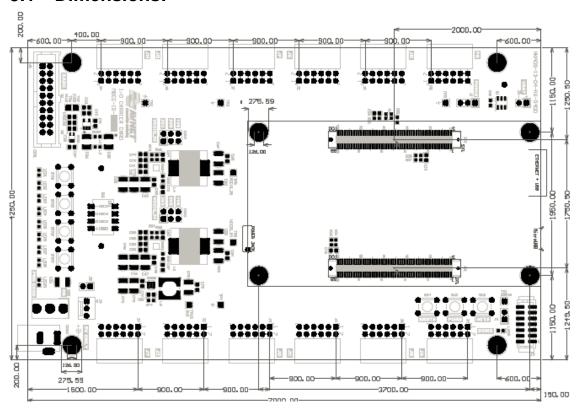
IOCC Horizontal Mechanical Dimensions (mils)
